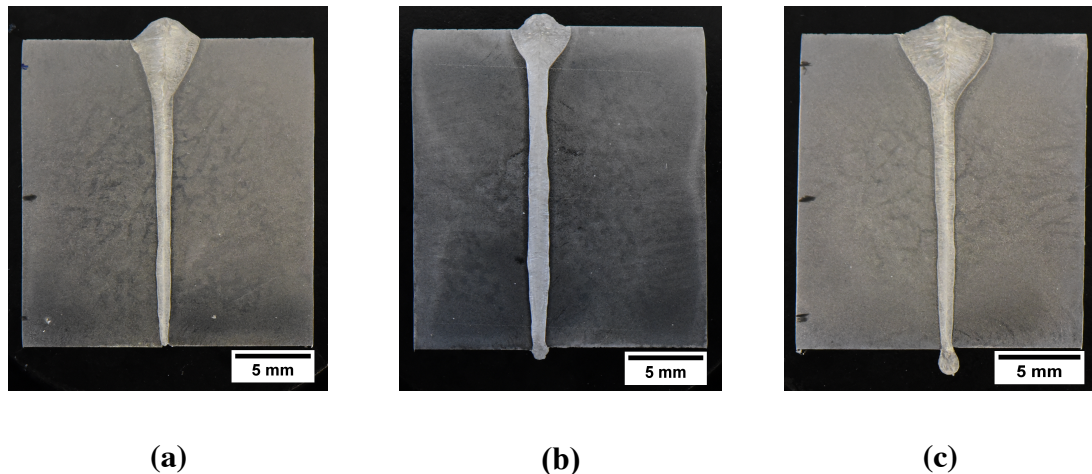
Macrostructure of the welds (a) W1, 100 mA beam current (b) W2, 110 mA beam current (c) W3, 120 mA beam current. 9 mm/s welding speed and -5 mA focus offset were used for the three welds.
